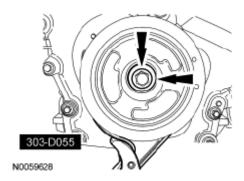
Locating Crankshaft Bolt And Washer Courtesy of FORD MOTOR CO.
